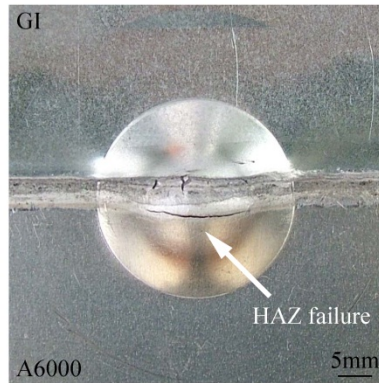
Erichsen cupping test specimen after testing of GI/A6000 joint
